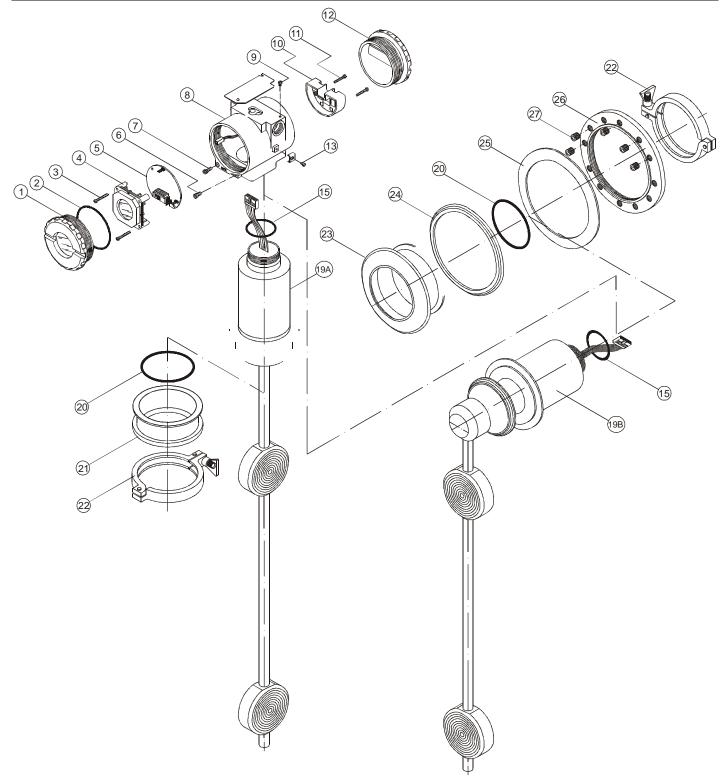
DT301 - Exploded View (Sanitary Model)
